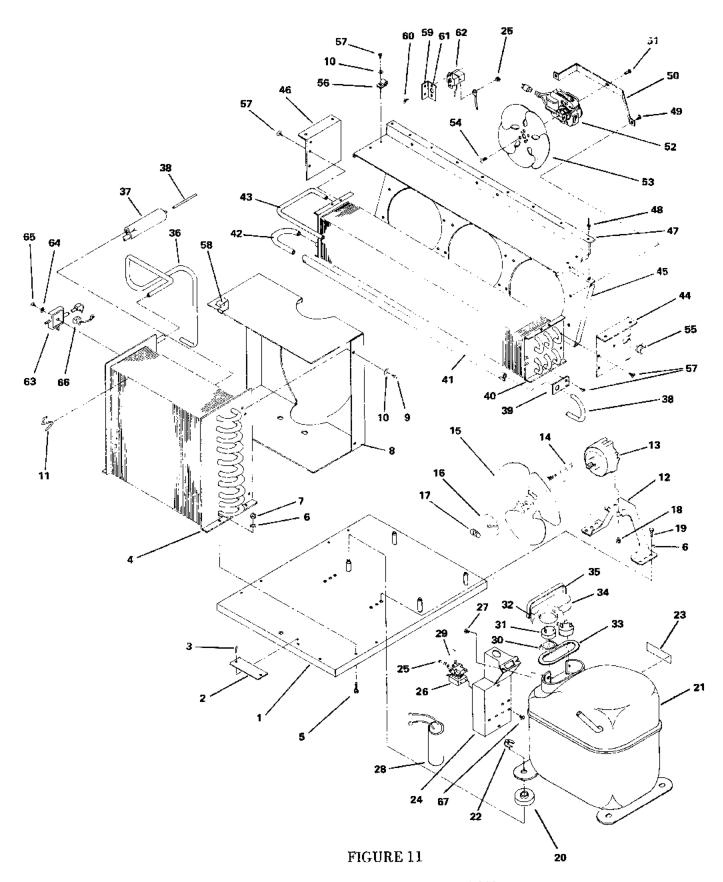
SANYO REFRIGERATION CHASSIS ASSEMBLY
